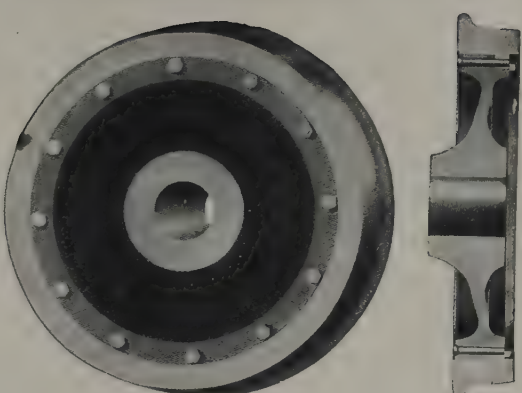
Cast Steel Plate Center with Tire Held by Shrinkage and Bolts.
